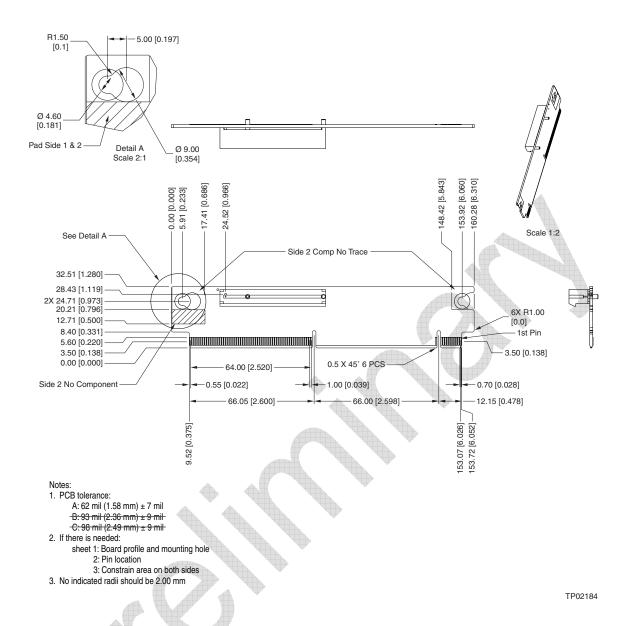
1U Full Height PCI Express* Riser Card Mechanical Drawing
